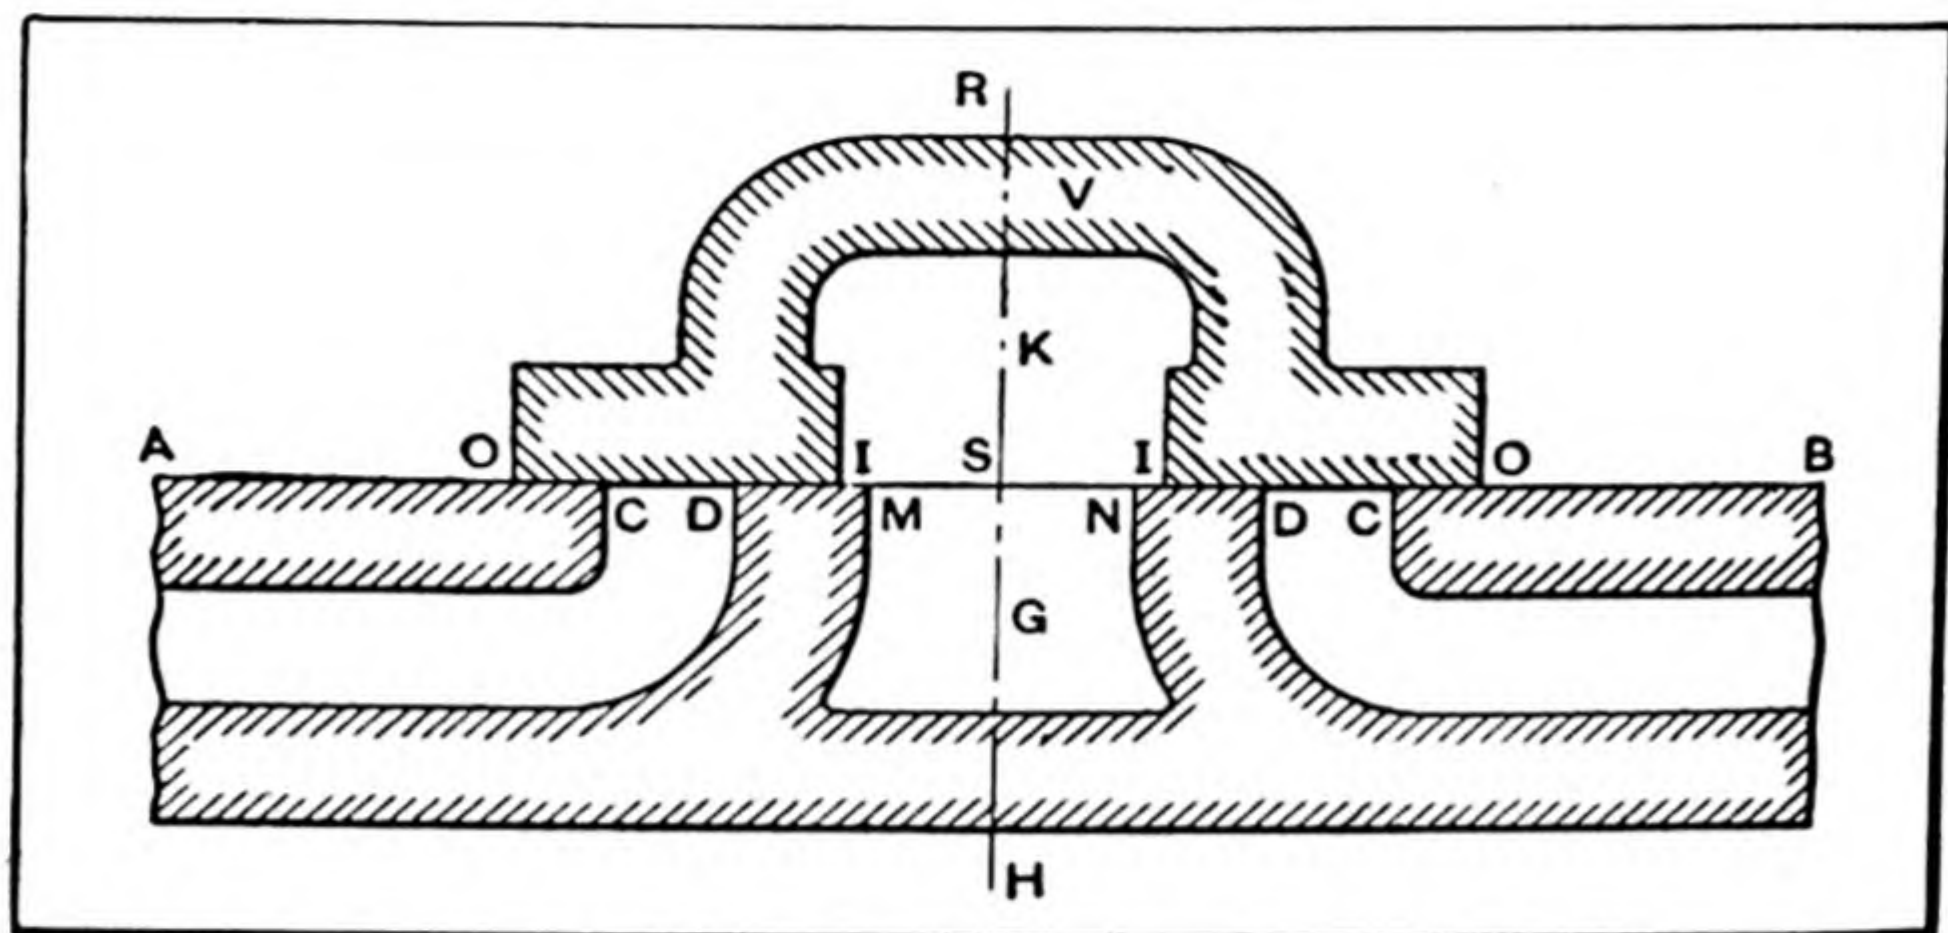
Longitudinal Section of a Steam Engine Slide Valve and Ports
